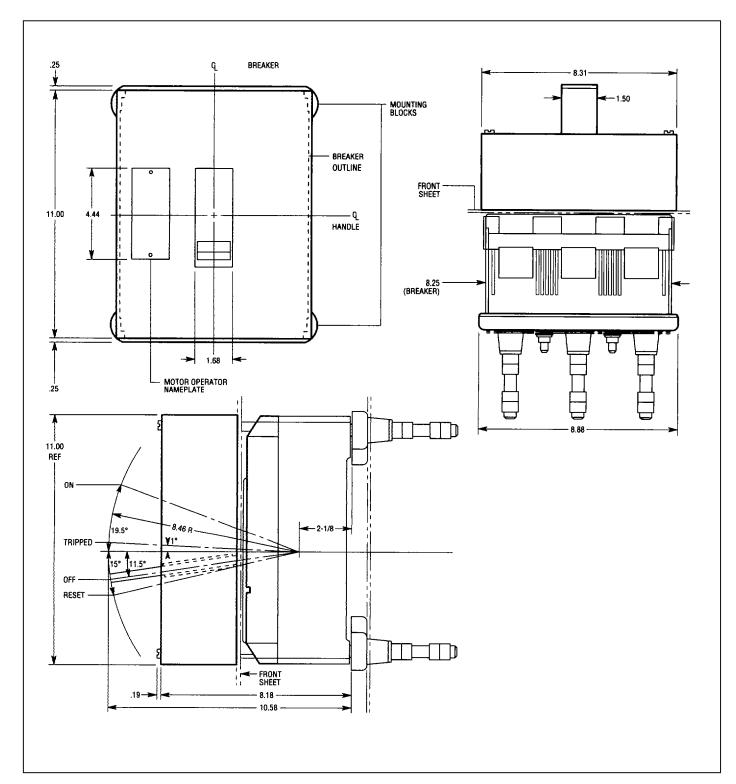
AQB-A250 or NQB-A250 Circuit Breaker and Motor Operator Outline Dimensions
